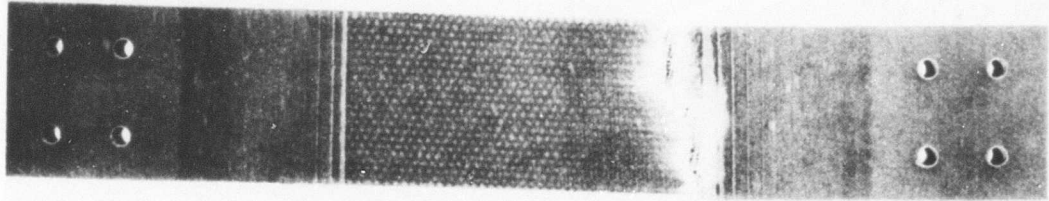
Specimen No. 3, Type I - Failure of Facing on Bag Side at Edge of Reinforcement.
